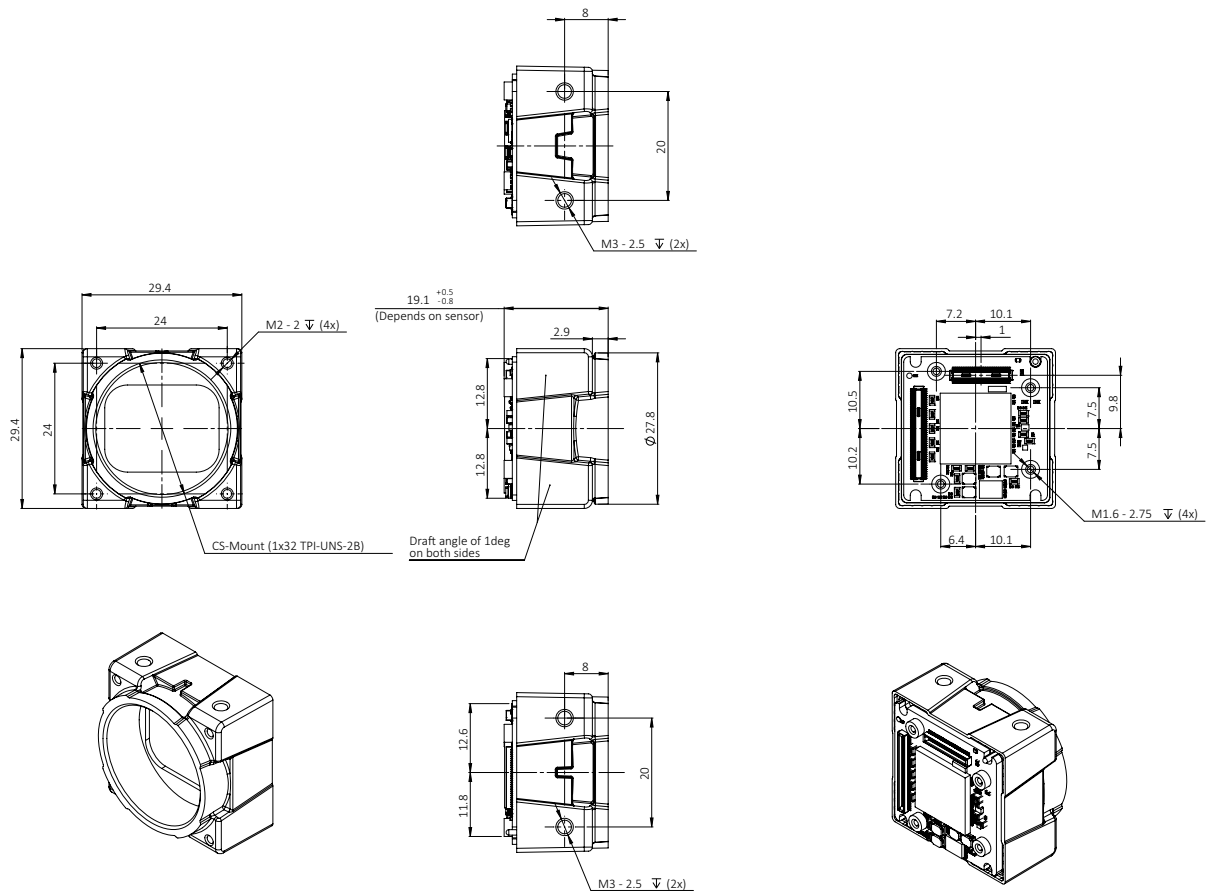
Open Housing CS-Mount (Alvium Flex) dimensions
